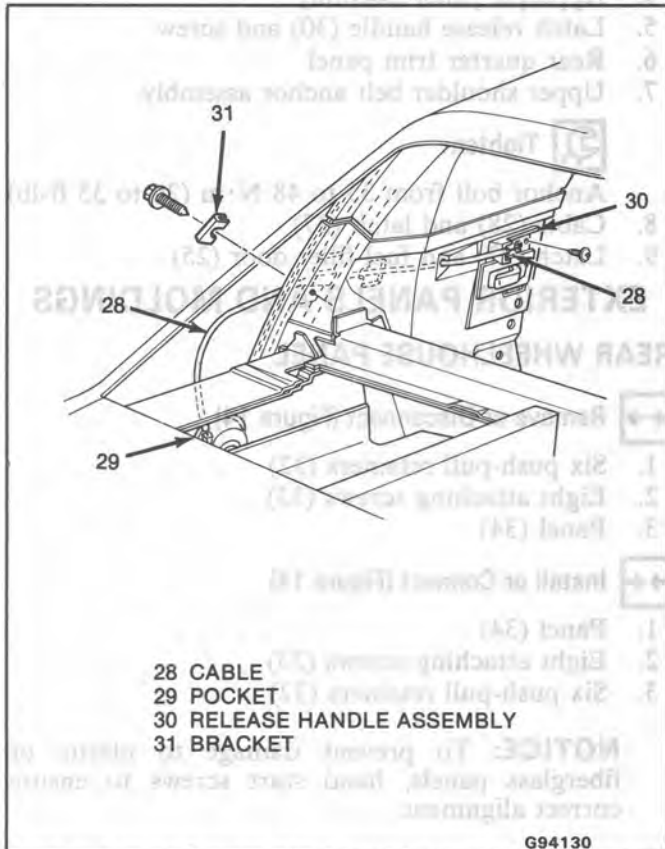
Fuel Filler Door Remote Latch and Cable Assembly
